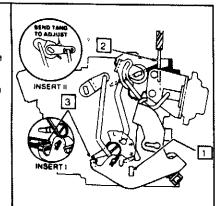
VACUUM BREAK ADJUSTMENT (Throttle side)
